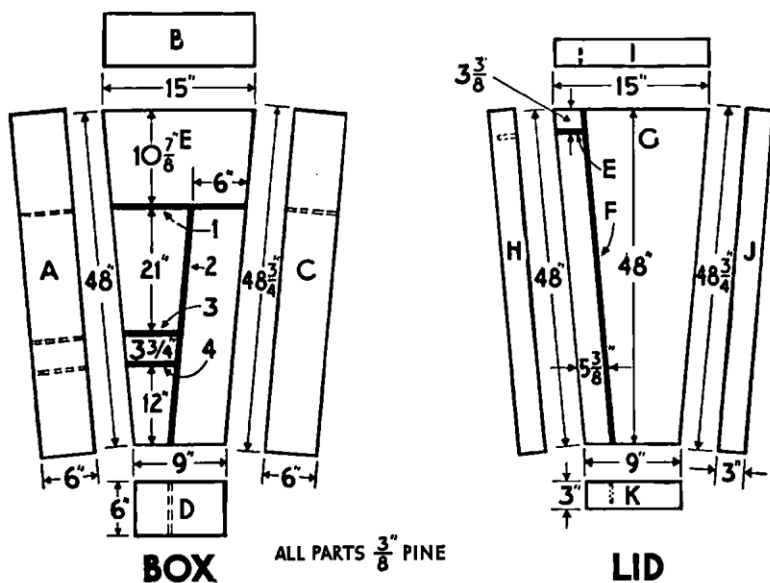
PLAN FOR CARRYING CASE—TRIANGULAR TYPE
